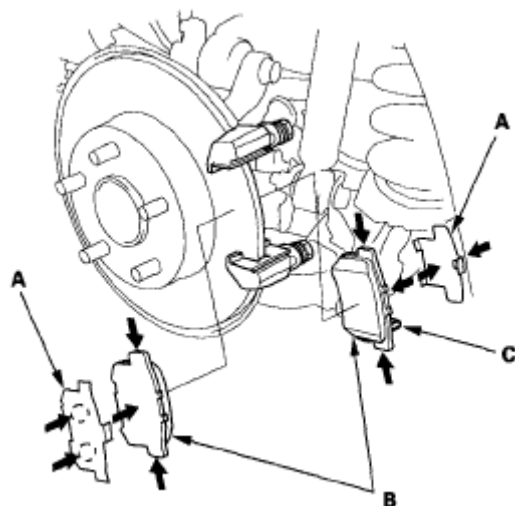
Applying Assembly Paste To Pad Side Of Shims And Brake Pads
